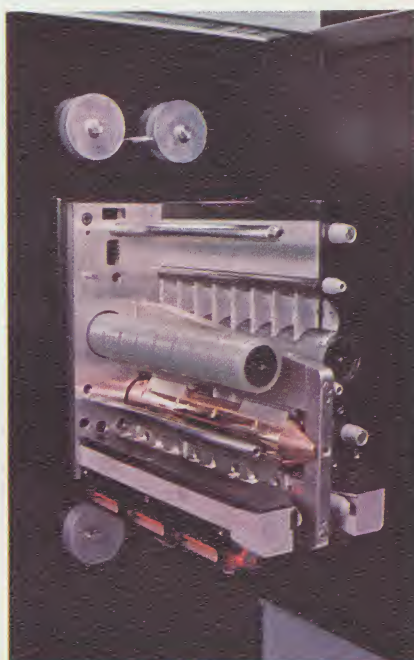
Multiple Drive Block Assembly with One Group of Drive Blocks Removed
